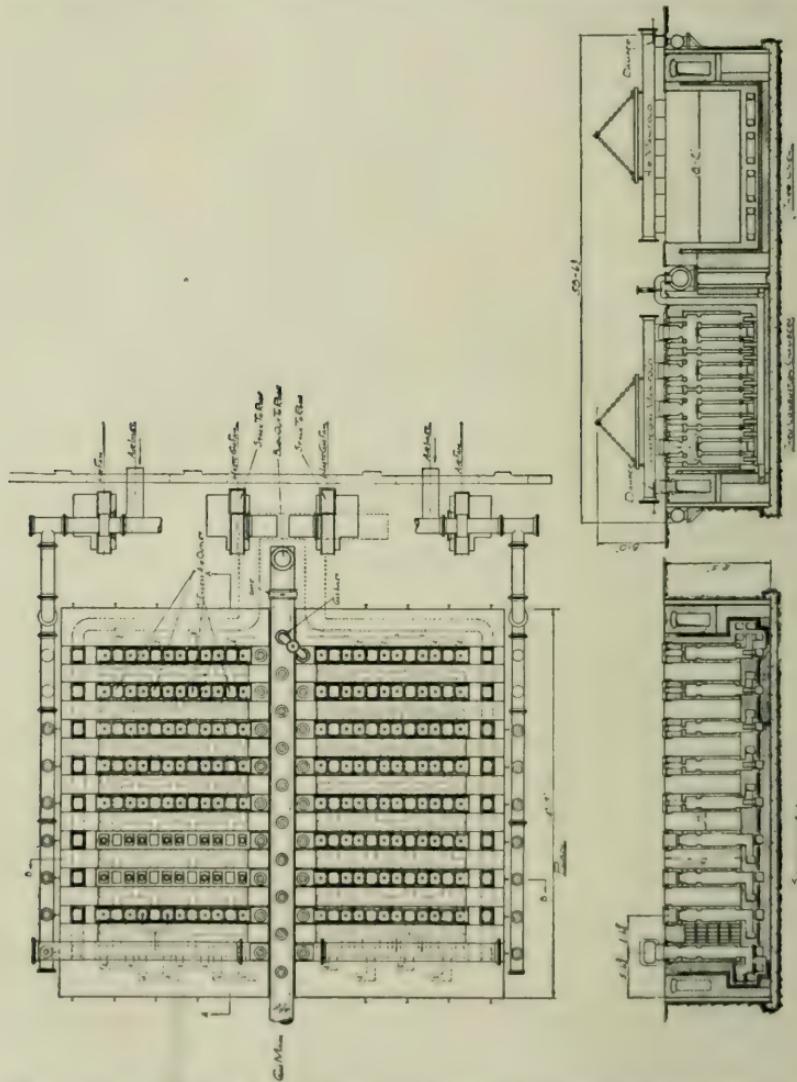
PLAN AND ELEVATION OF LATITUDINAL GAS FIRED FURNACE
